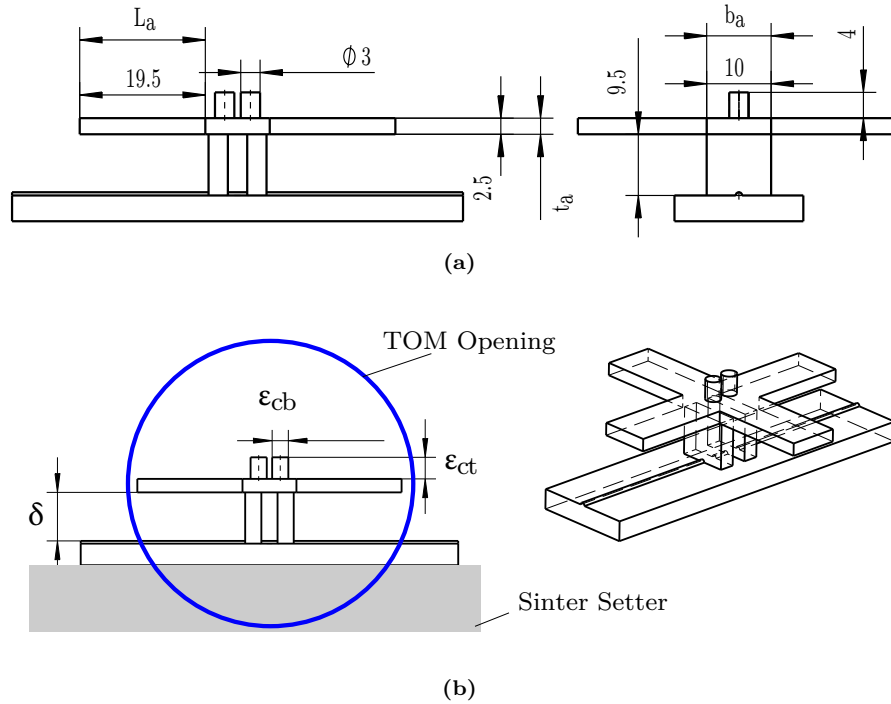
(a): The technical drawing of the cross-shape geometry (dimensions in mm) and (b): the schematic and the positioning of the cross-shape geometry in TOM.
